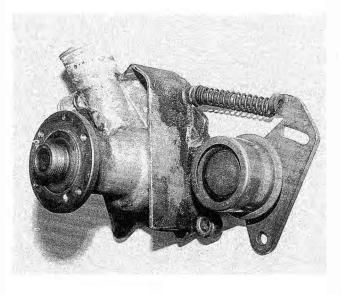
Relationship of camshaft belt tensioner pulley, tensioner spring and pin, and coolant pump.
